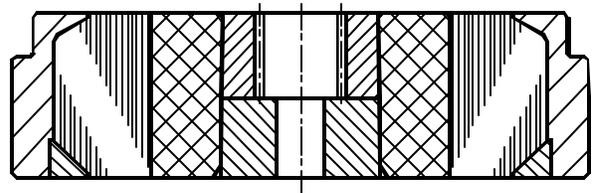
STRECON® E+ tool for manufacture of planetary gear wheel
